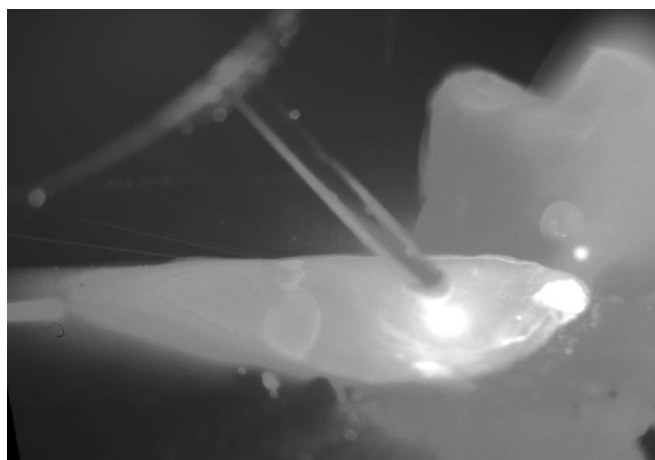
Visible-light image captured during Rapid Arc hybrid welding
